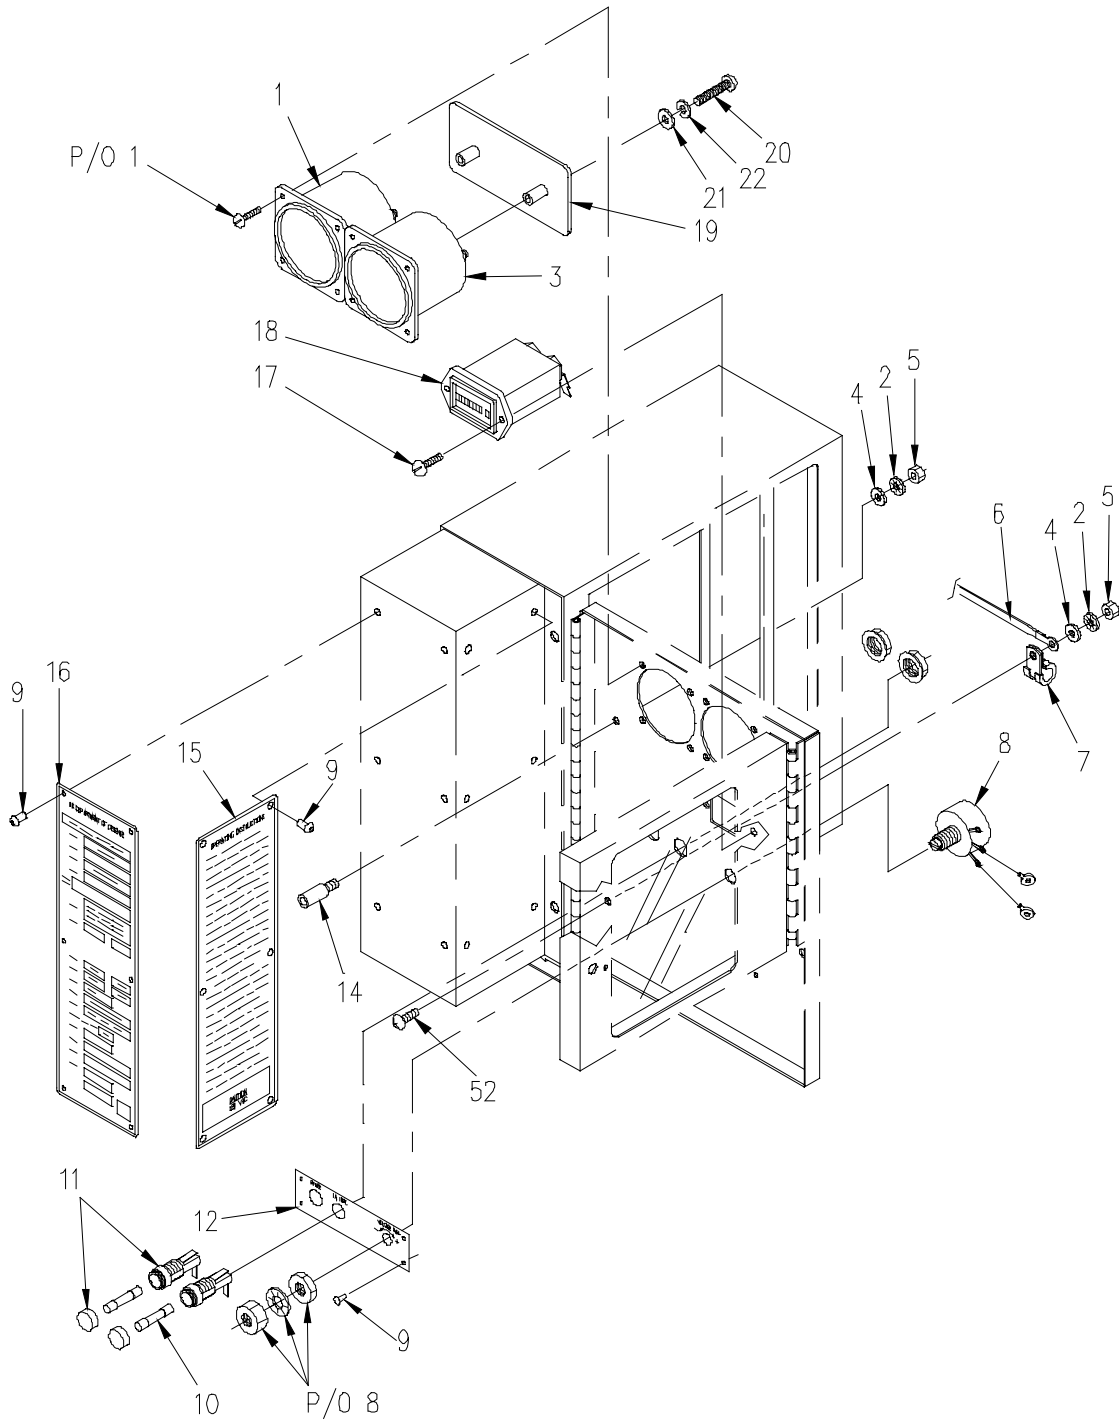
Control Panel Assembly (MEP-501A) (Sheet 1 of 3)
